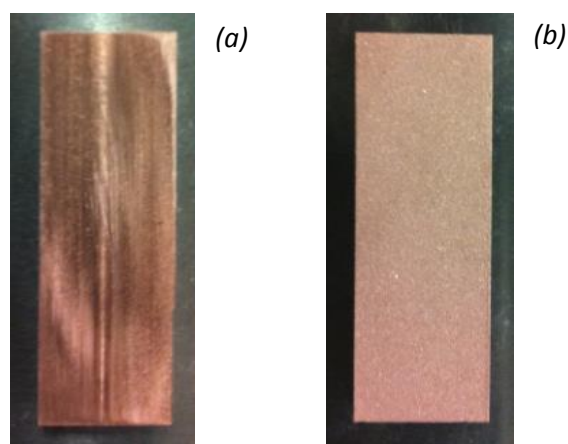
Comparison of workpiece surface: (a) before bead blasting, (b) after bead blasting
